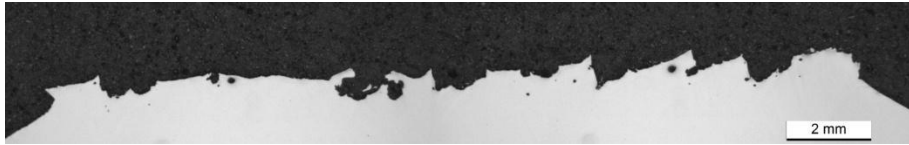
An optical microscope image showing the fracture surface cross-section, depicted in Figure 76 a, Alloy 52 half of the specimen.
